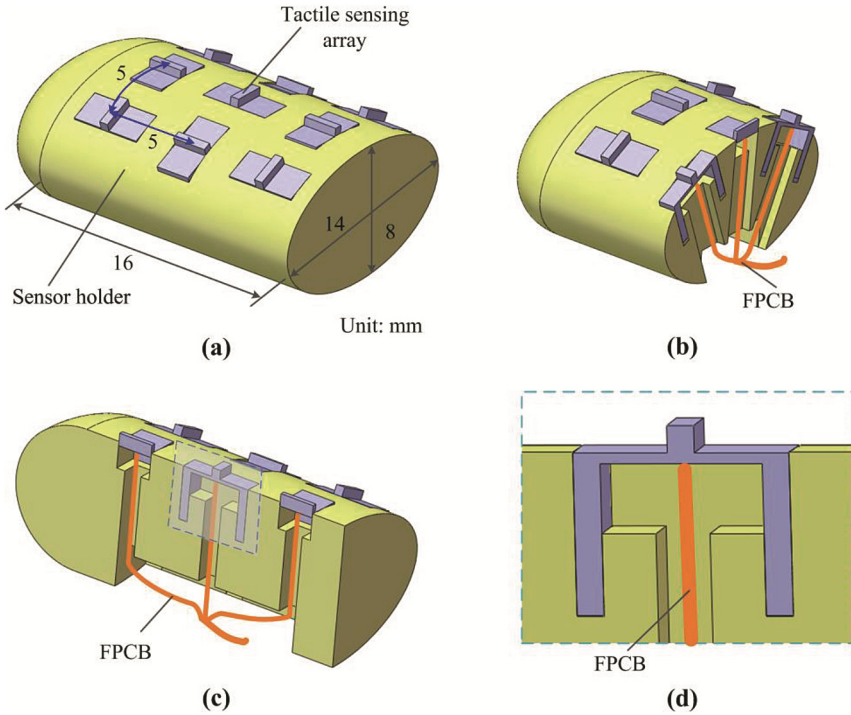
Design of sensor structure. (a) Schematic of the whole sensor; (b) Cross section view of the sensor in a plane perpendicular to the axis direction of the holder; (c) Cross section view of the sensor in the vertical symmetry plane; (d) Local view of the sensing unit being fixed into the grooves of the sensor holder.
